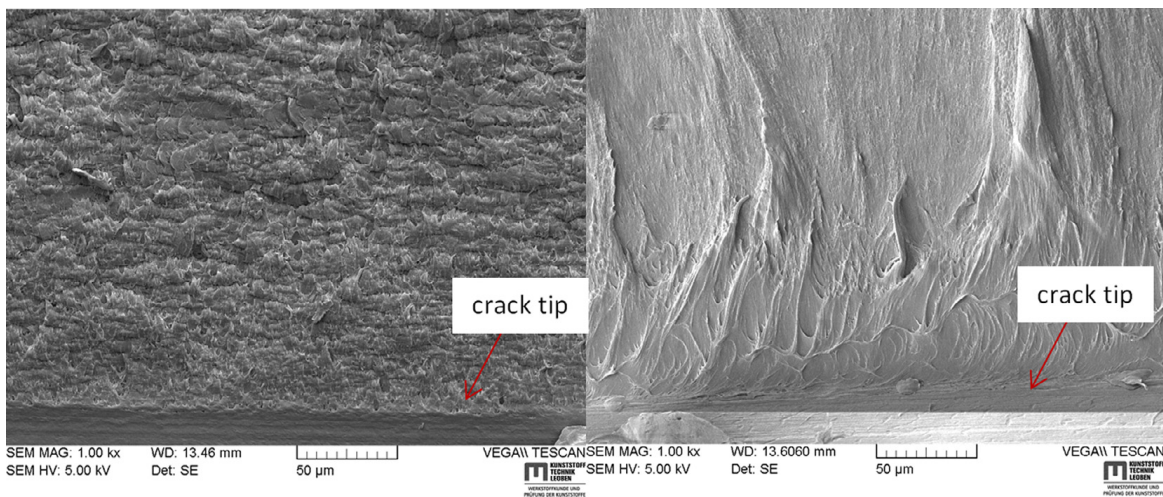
Fracture surfaces of PP-B (left picture) and PP-R (right picture) close to the initial notch.
